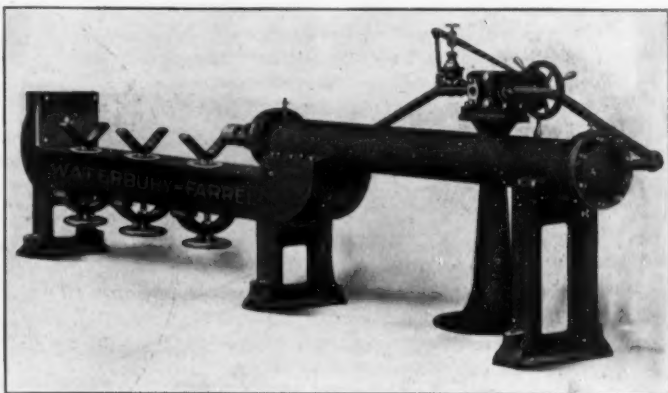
MACHINE FOR REMOVING CORES FROM SEAMLESS TUBE CASTINGS.
